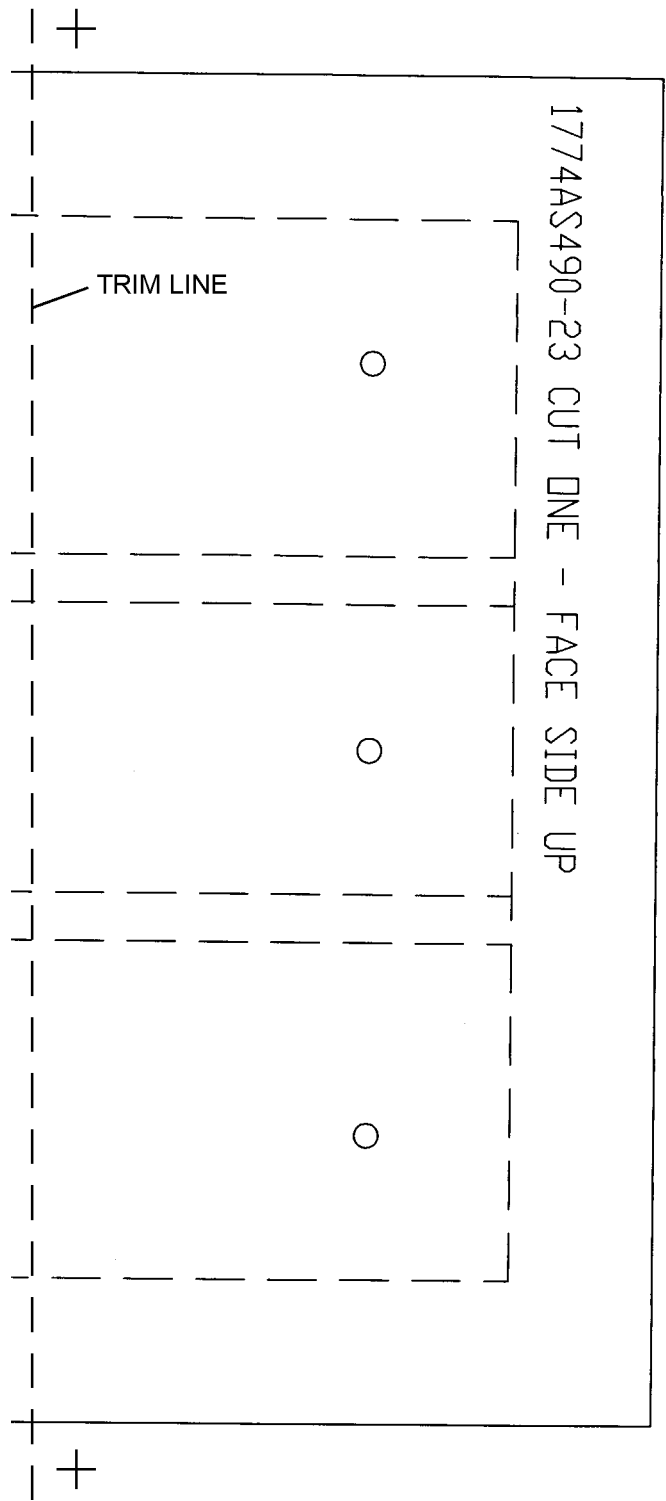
E. Pistol Pocket Vest Snap Fastener Panel Front Pattern (Sheet 2 of 2)
